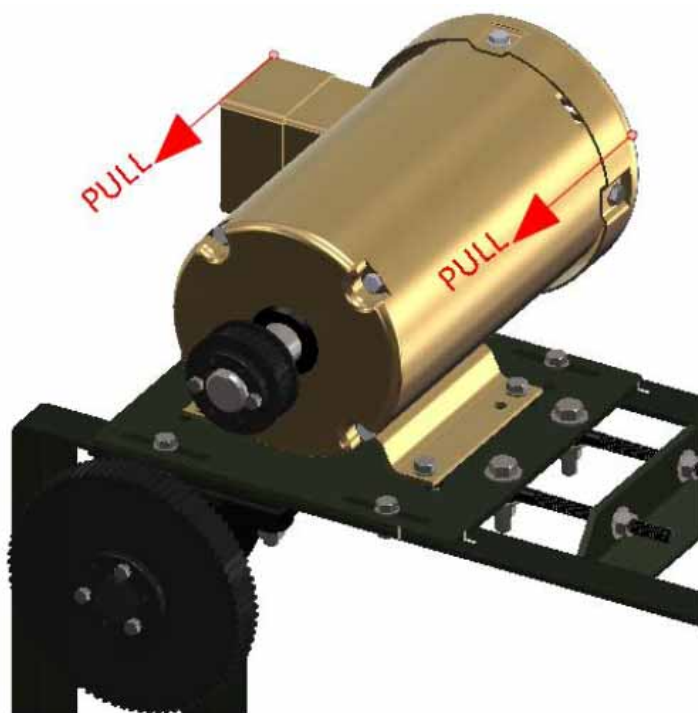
Pull the motor as shown to square it with the motor plate prior to tightening the motor bolts
